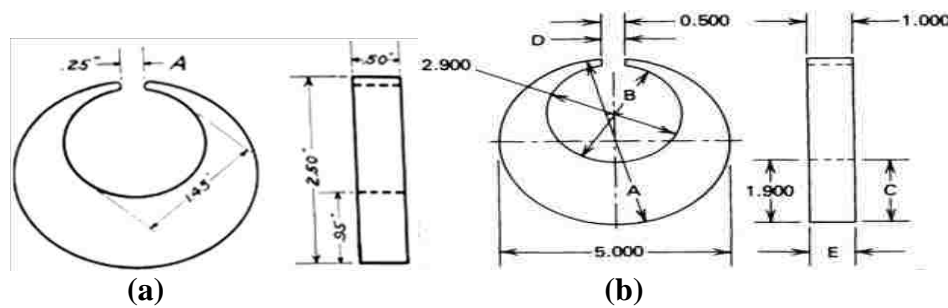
(a) Navy C-ring dimensions as used by French [37], and (b) Navy C-ring specimen used by Webster and Laird [38] (dimensions in inches).
